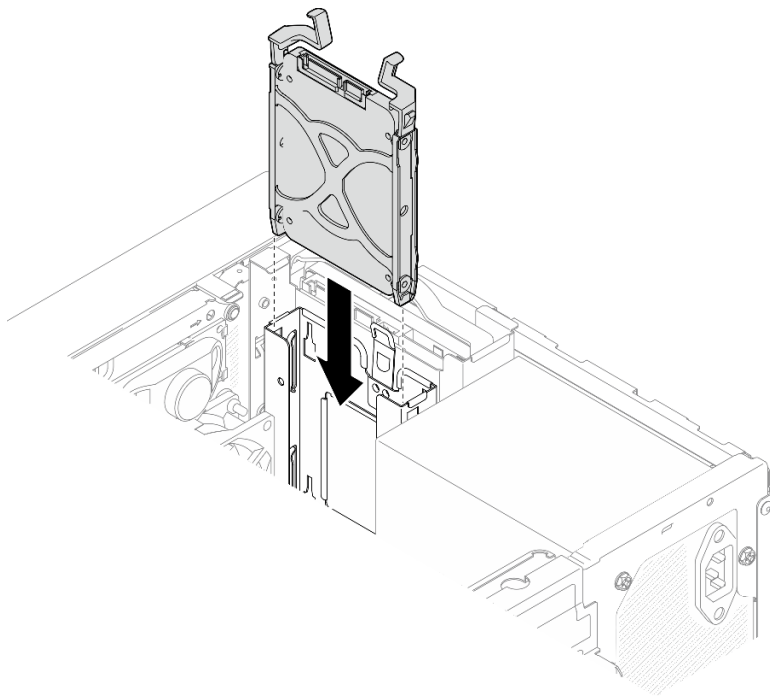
Installing the 2.5-inch drive assembly into drive bay 1
